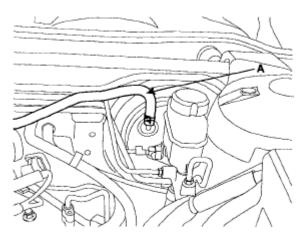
Identifying Heater Hose Courtesy of HYUNDAI MOTOR CO.
